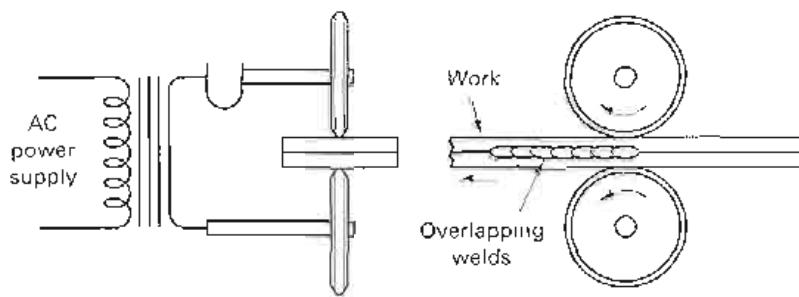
Schematic representation of the seam-welding process.
